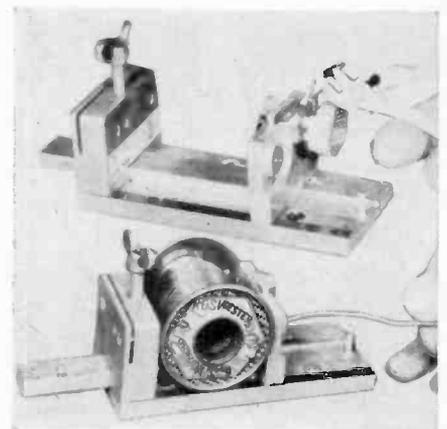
Ordinarily used for cutting control shafts, this popular jig can double as a "third hand" when lying idle.
